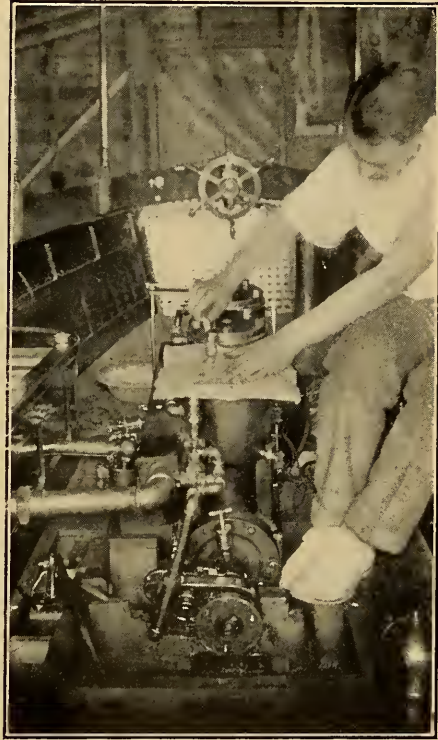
CUTTING OUT GASKETS TO PROPER SIZE AND SHAPE BY TAPPING WITH MACHINIST'S HAMMER
